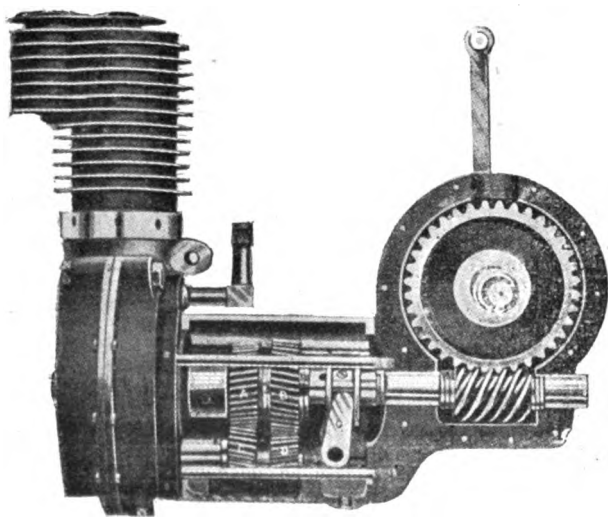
View of Engine, Change-Speed Gear, and Worm-Gearing on Starley Motor-Bicycle.
